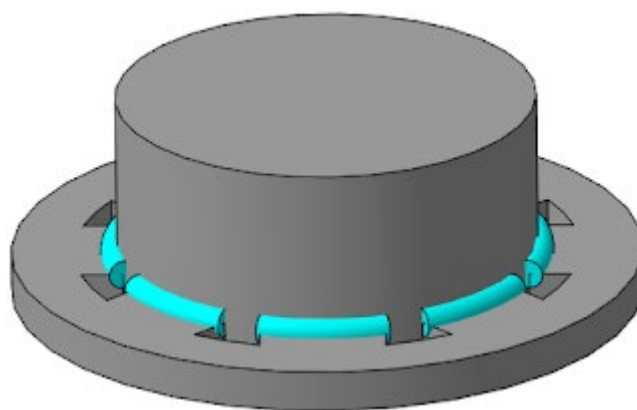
View of the weld in CAD WELDING-3D.
